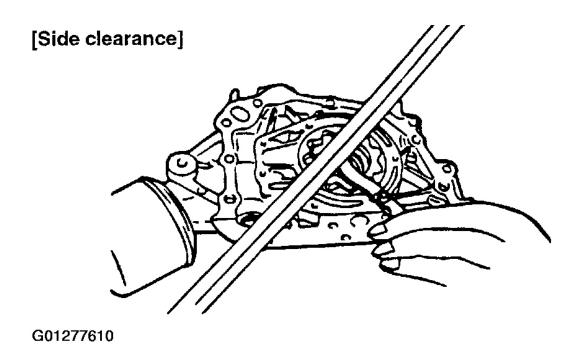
Checking Side Clearance Courtesy of HYUNDAI MOTOR CO.
